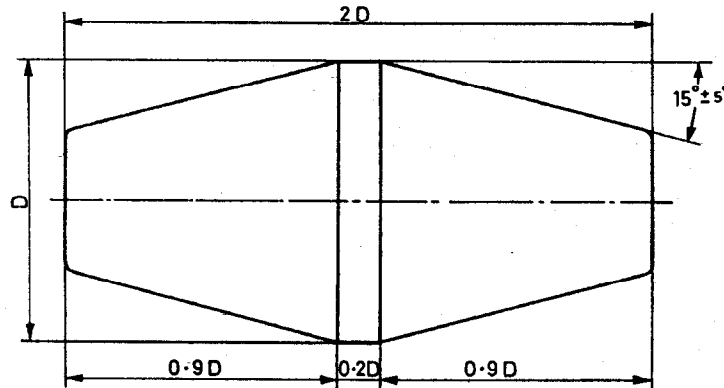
GAUGE FOR CHECKING MINIMUM INSIDE DIAMETER OF CONDUITS IN THE STRAIGHT CONDITION
